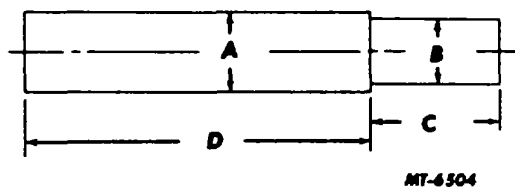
Recommended Type of Camshaft Bushing Removing Tool
